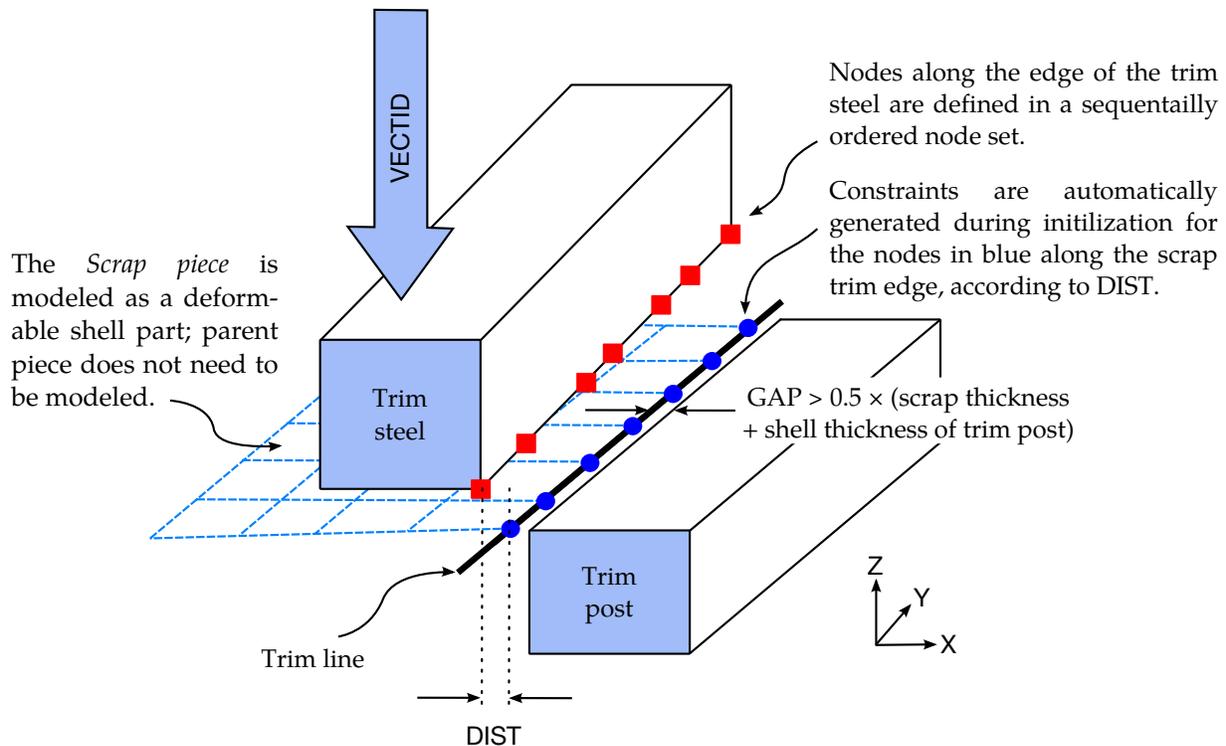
Modeling details of the constraint release method. *Drawing modified from the original sketches courtesy of the Ford Motor Company.
